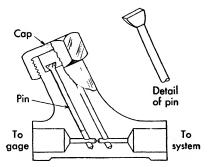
Diagrammatic drawing of a pressure-gauge snubber.
